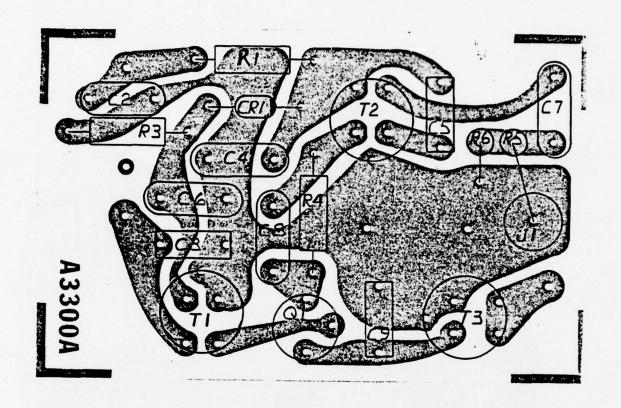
P.C. BOARD LAYOUT FOR THE A3300A CRS SECOND MIXER ASSEMBLY
